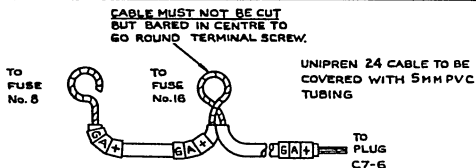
METHOD OF CONNECTING PROTECTED CABLE TO LOOM C7 SOCKETS
